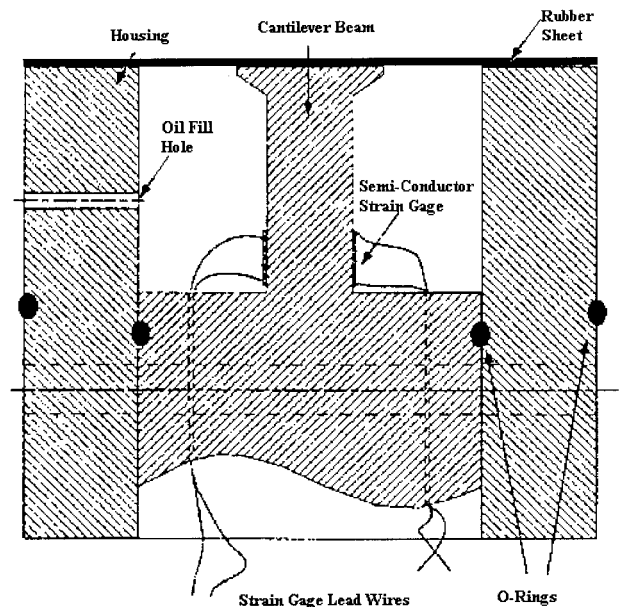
Nonnulling skin-friction gauge with rubber sheet to provide damping and retain the fill liquid.
